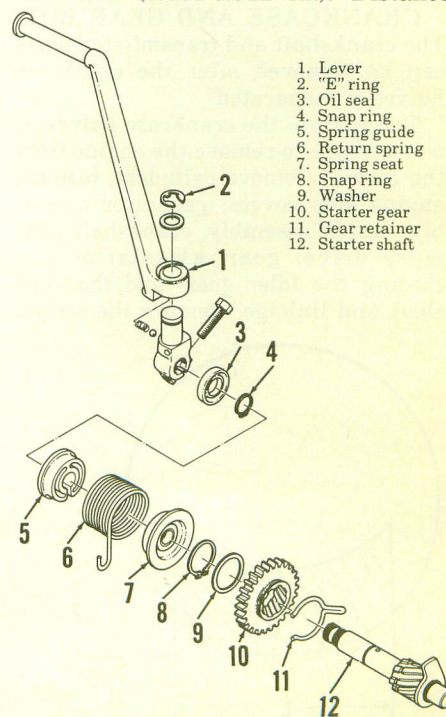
Exploded view of kick starter assembly used on models CS5 and RD200A.
